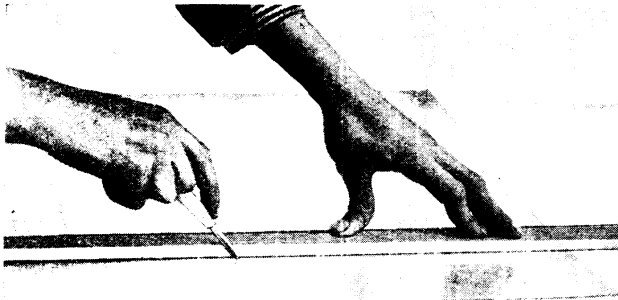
Celluloid is obtainable in sheets, as the one here being cut. Marking out may be done with a pin or sharp point, and cutting partially accomplished with a penknife
